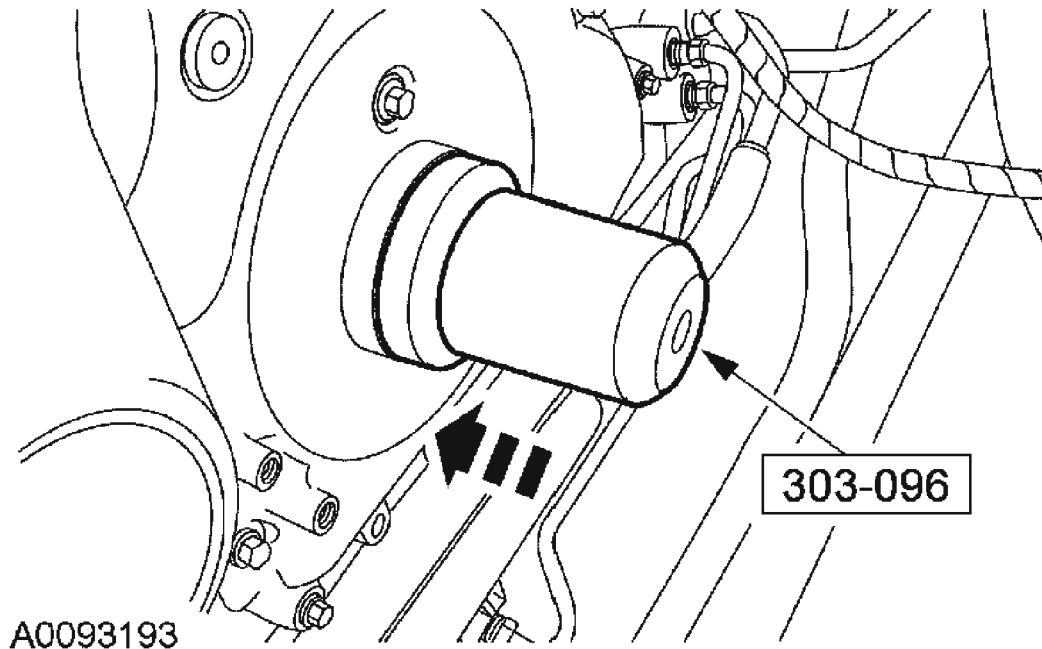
Installing Crankshaft Front Oil Seal Using Special Tool
